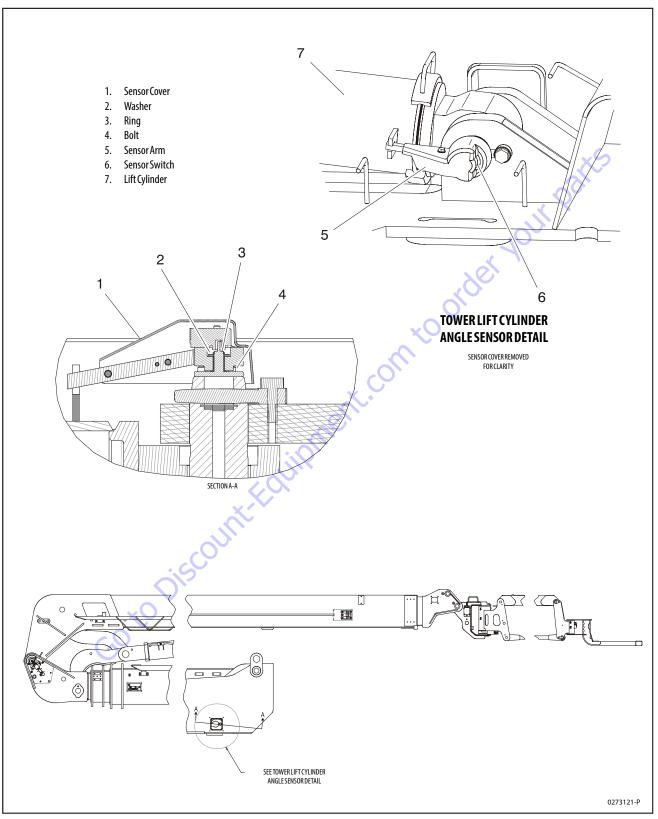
Boom Sensor Locations - Tower Lift Cylinder Angle Sensor
